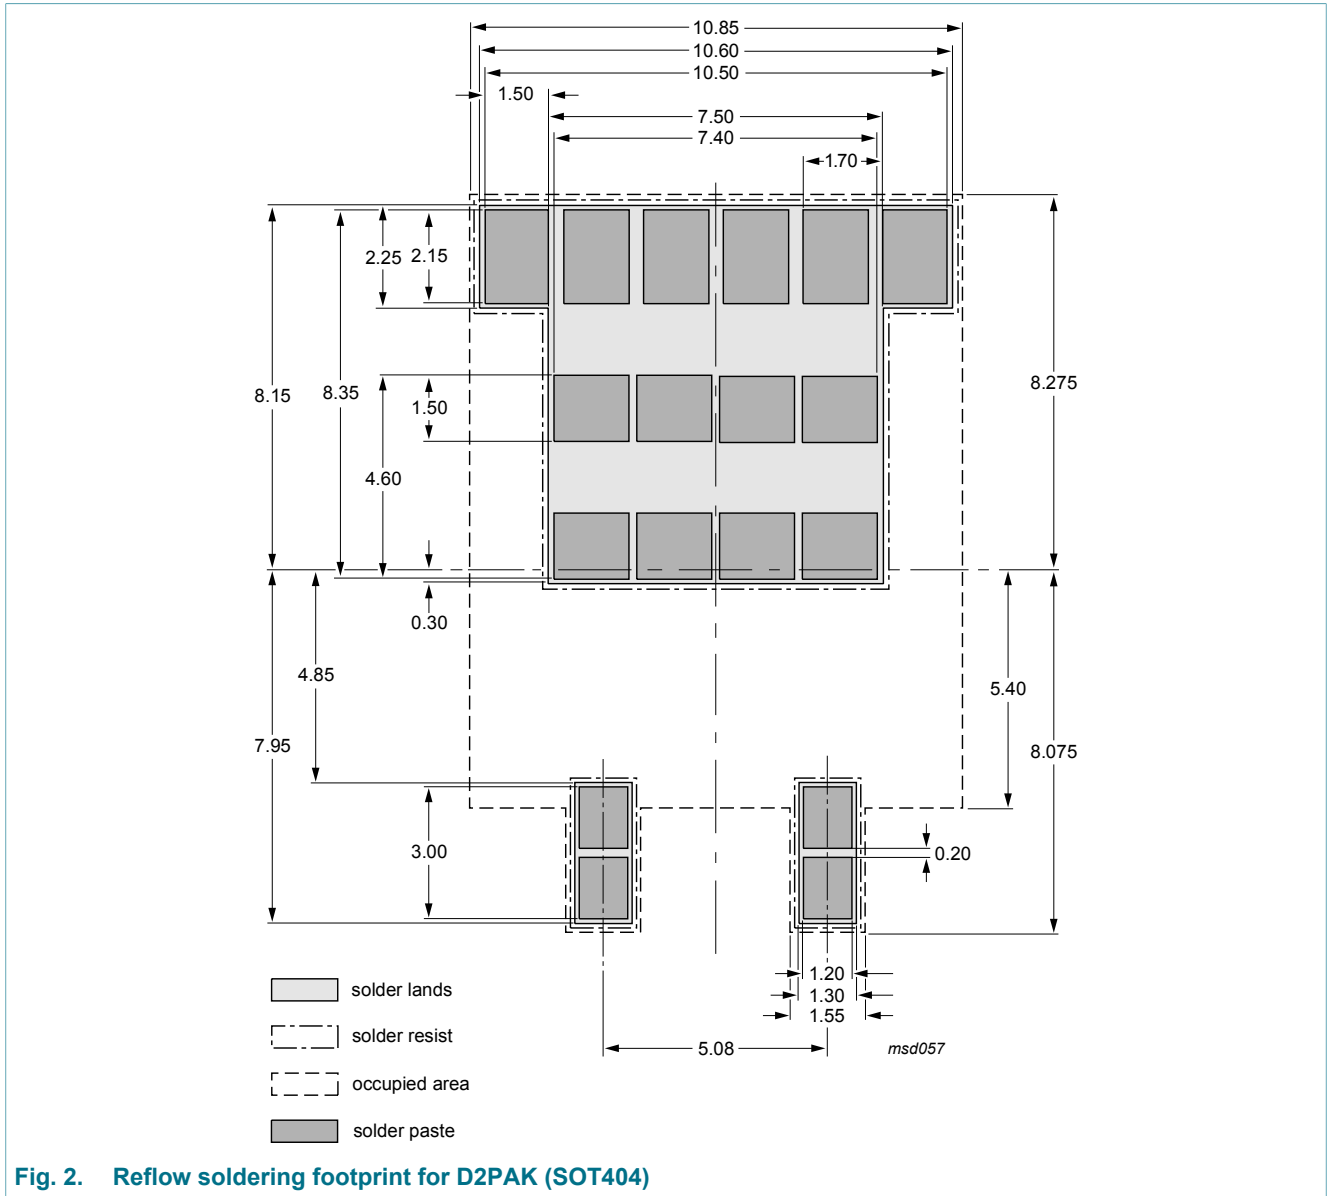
Reflow soldering footprint for D2PAK (SOT404)
